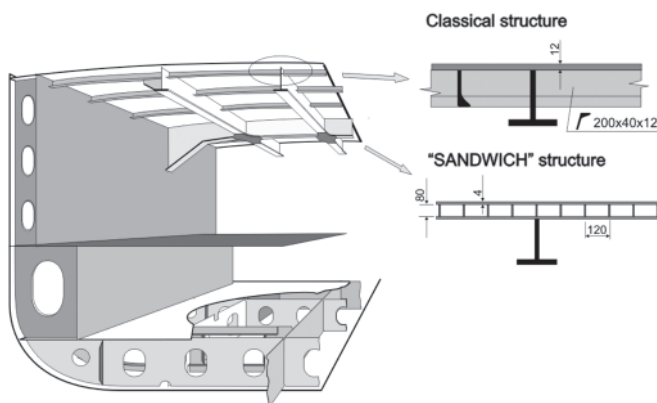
Example ship deck structure configurations: conventional structure (on the left); I-core-sandwich structure (on the right)
